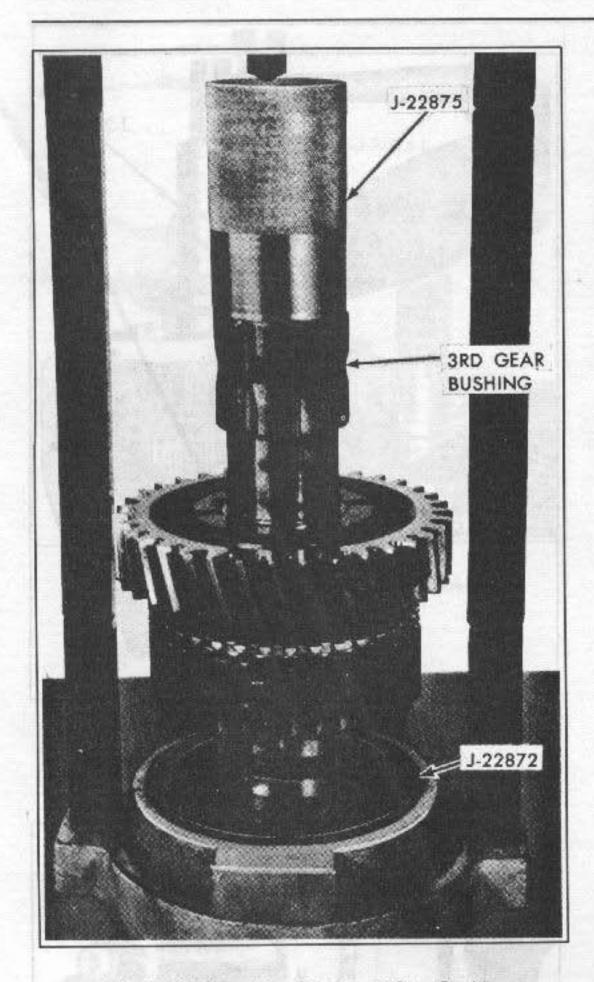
B-18L-Installing 3rd Speed Gear Bushing
